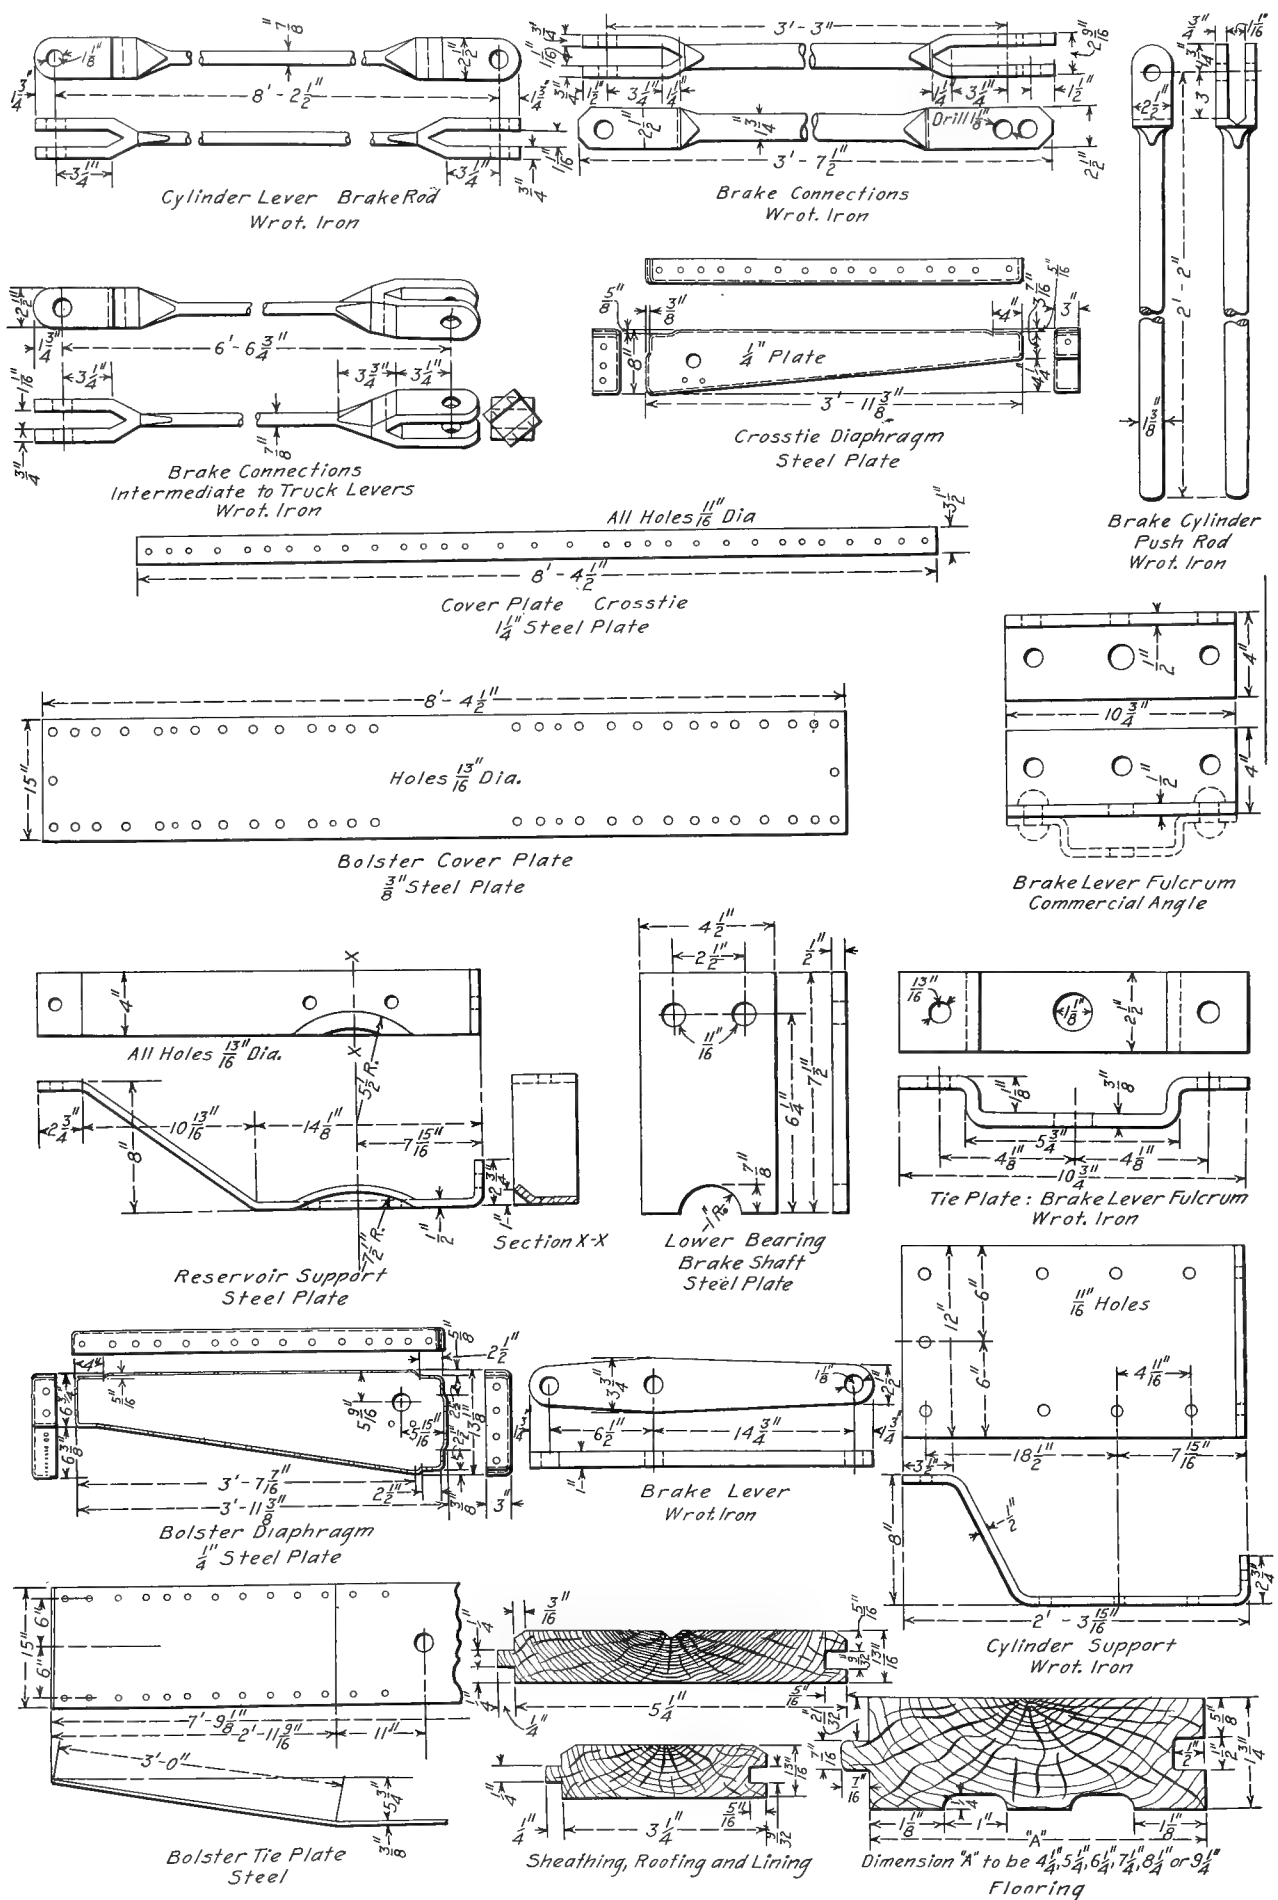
Details Used on New York Central Steel Underframe Box Car Shown in Figs. 279 and 280.
